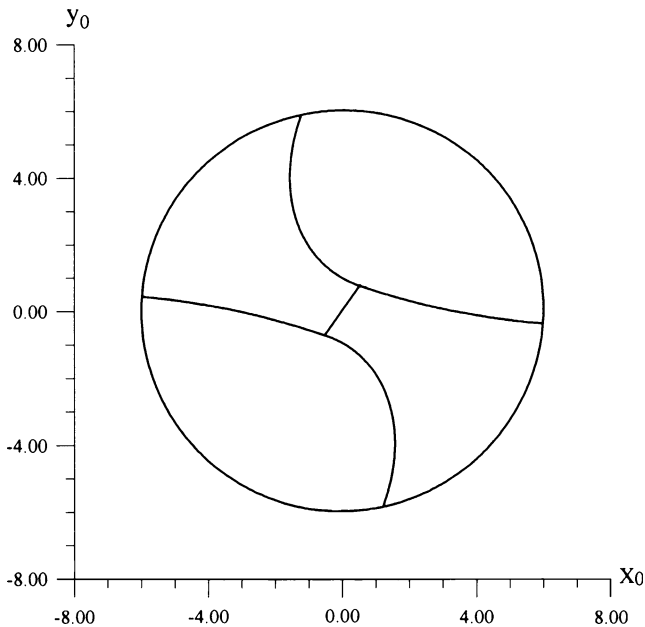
Front-end view of flanks and major cutting edges of helical drill
